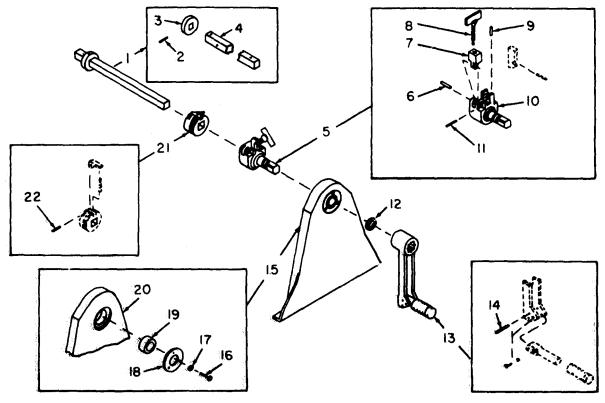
Reeling Machines, Cable, Motor Driven RL-172/G and RL-172A/G.
